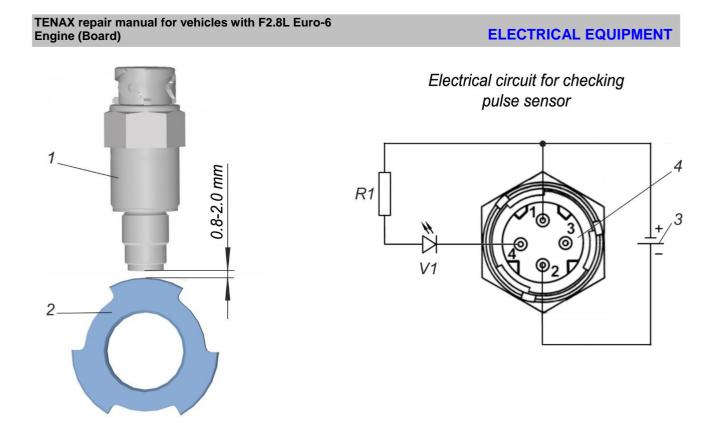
Pulse sensor check circuit: 1 – pulse sensor; 2 – rotor; 3 – battery; 4 – sensor plug connector; R1 – resistance 600 Ohm; V1 – LED
